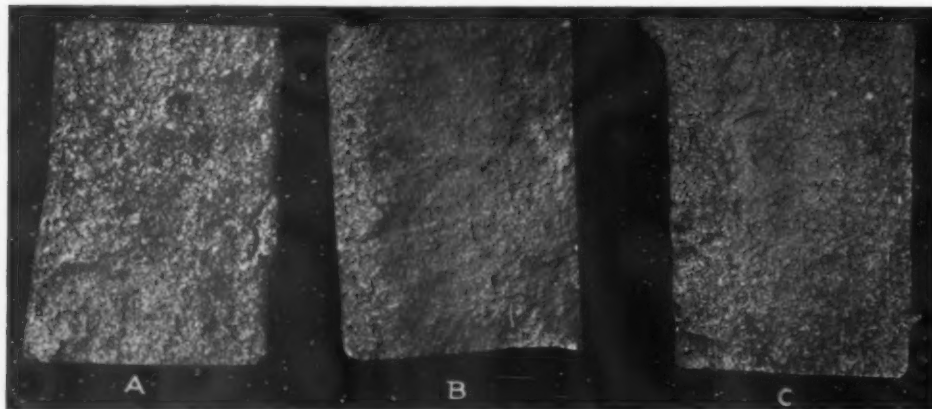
Three fractures of gear blanks showing the powerful influence of mould materials on the soundness of cast iron.
